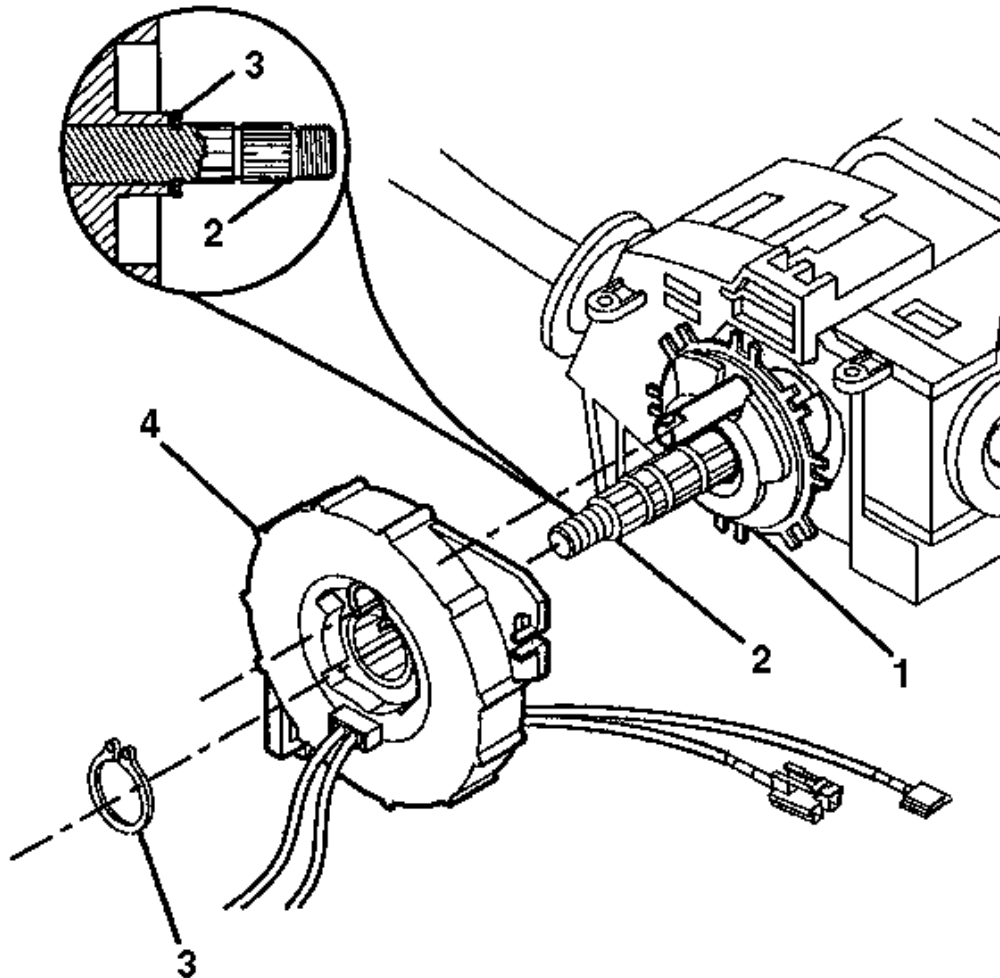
Identifying SIR Coil, Steering Shaft Assembly & Retaining Ring
